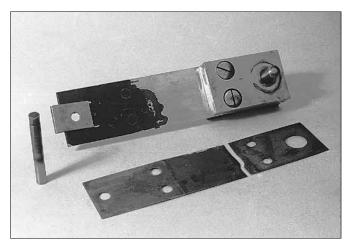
The broken suspension spring (below) and the new spring secured in the top block, with one of the hole punches and holding jigs.
